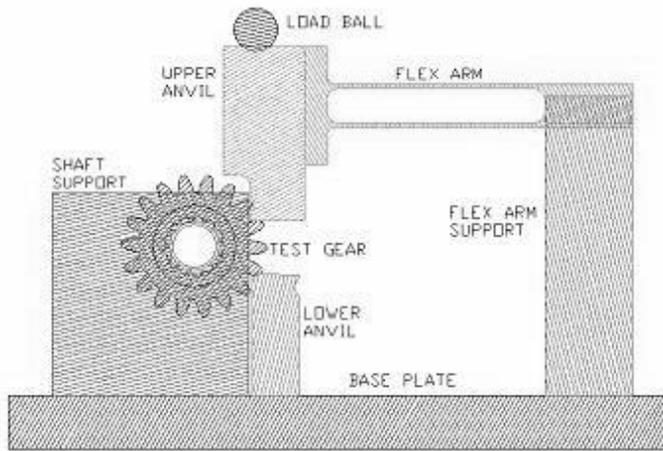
Schematic of tooth bending fatigue fixture at Gear Research Institute.
